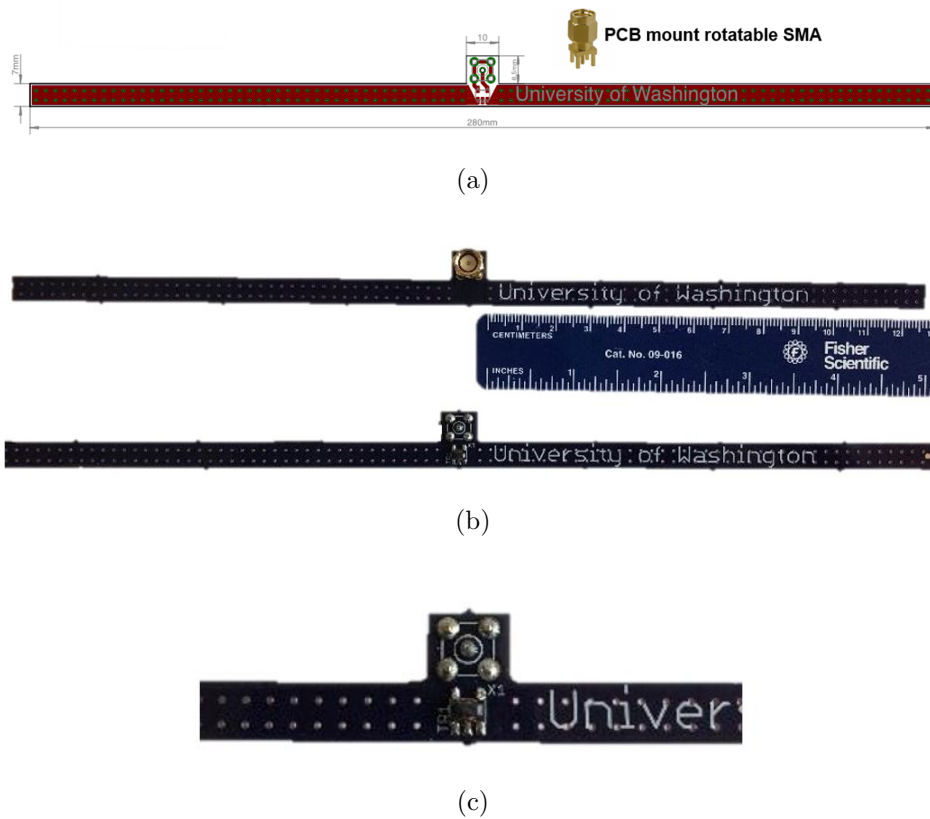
(a) Schematic of PCB layout (b) Fabricated PCB antenna with balun (c) Close-up of balun.
